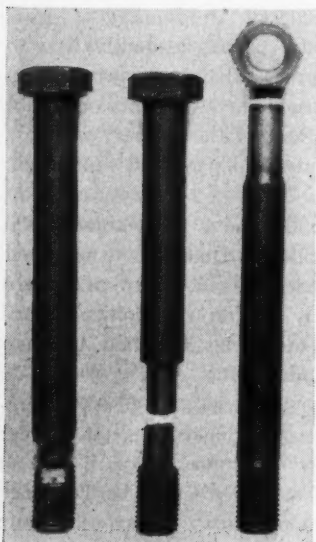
Shows typical failures of bolt specimens: Thread break at extreme left, notch break in center and head break at left
